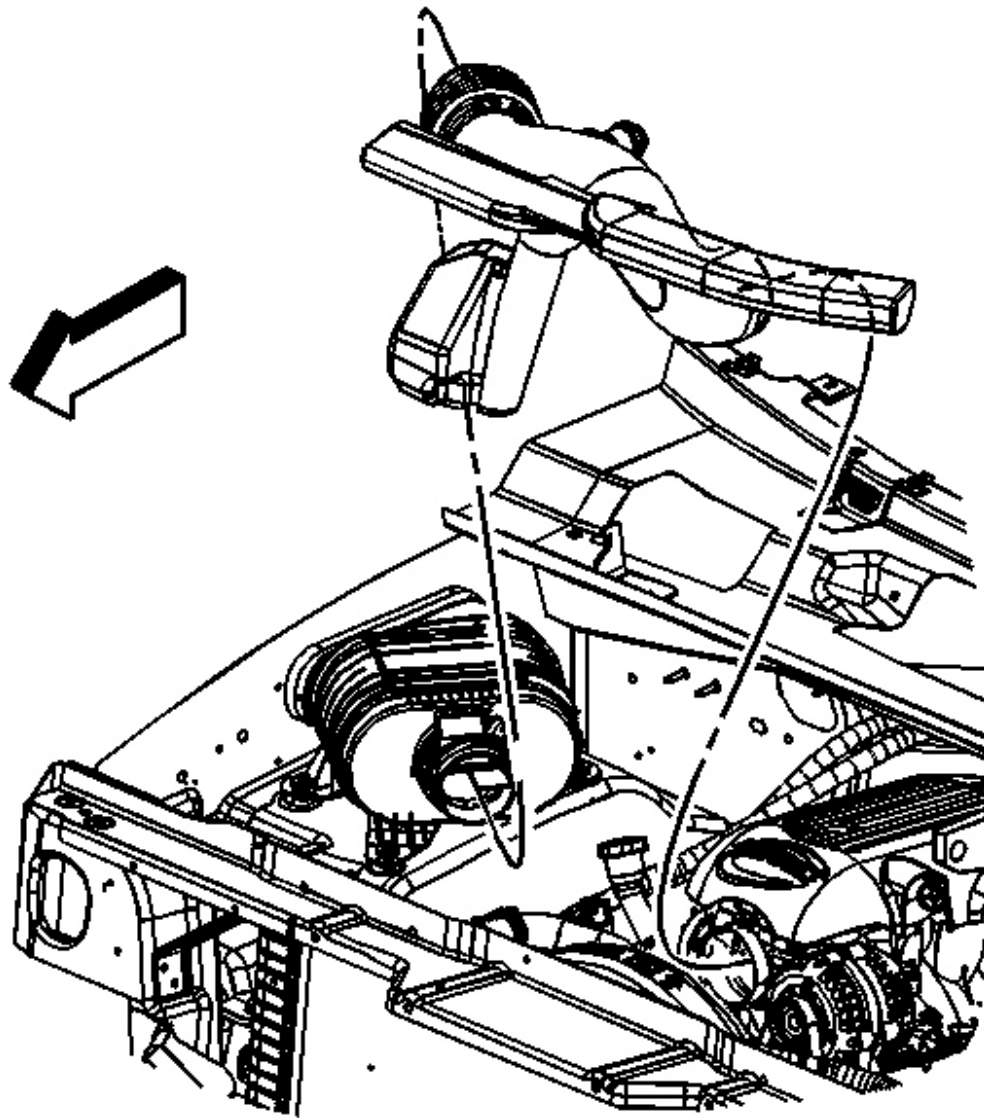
MAF/IAT Sensor & Air Cleaner Assembly
